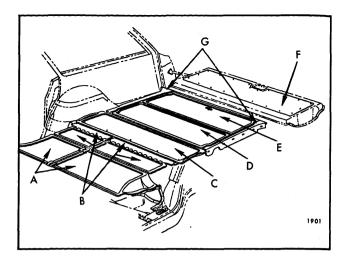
Folding Seats and Floor Panels Chevrolet "B-45" Styles
